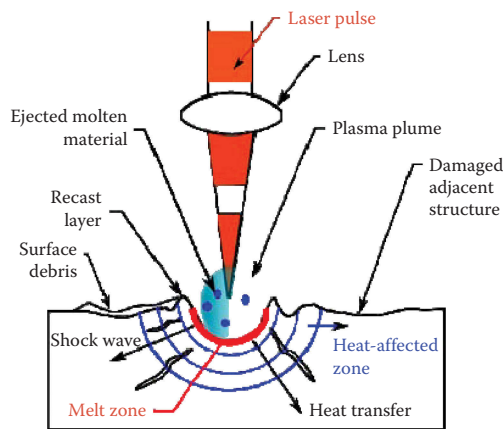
Schematic representation of the basic mechanism of laser micromachining and machined surface
